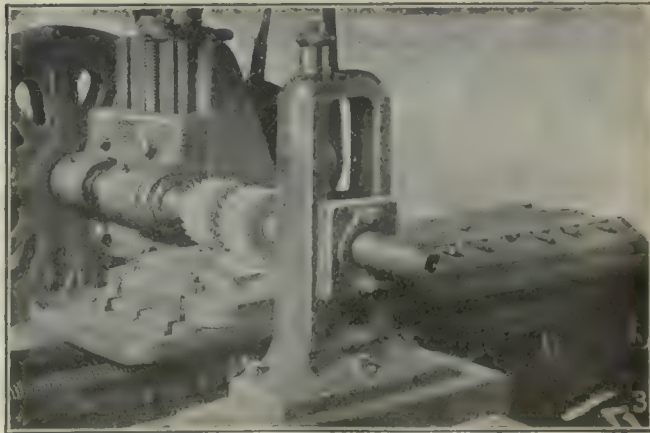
MILLING DIES TO UNIFORM THICKNESS
